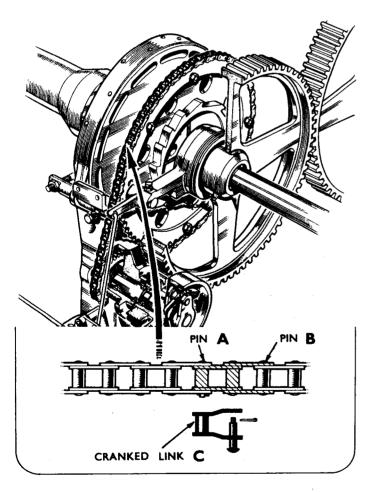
Shortening Boom Hoist Controlled Lowering Unit Chain.
